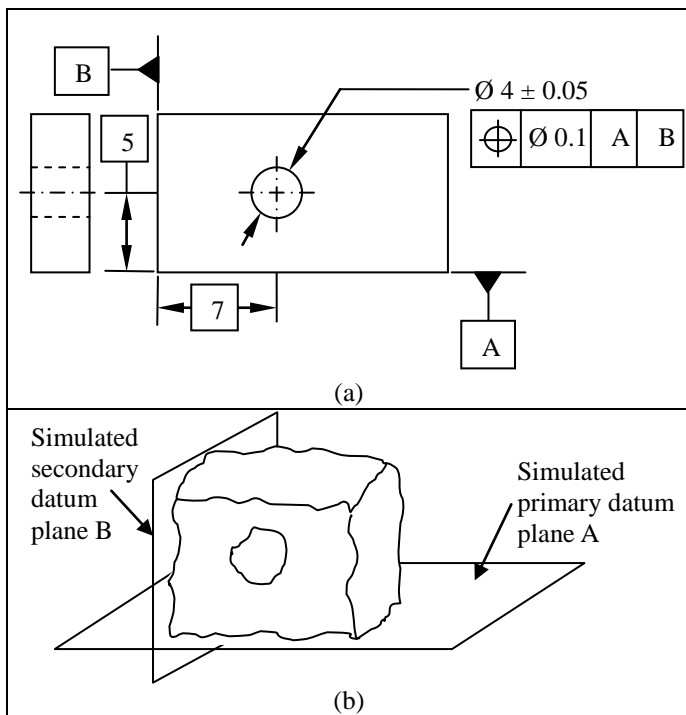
A simple example of (a) specification during design of a part, and (b) establishment of a system of primary and secondary datum planes on a manufactured instance of the part. The secondary datum plane B is required to be perpendicular to the primary datum plane A.
